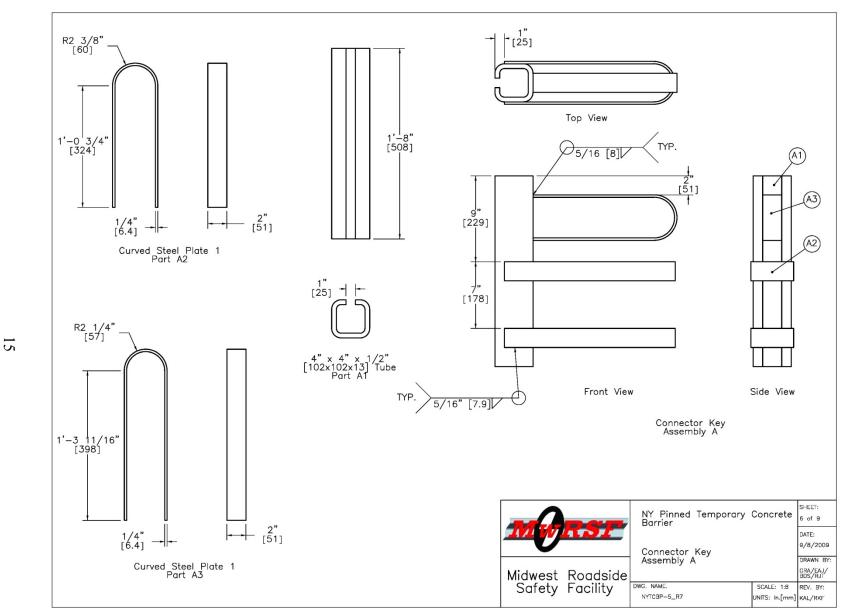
Temporary Concrete Barrier Connector Assembly Detatils, Test No. NYTCB-5
